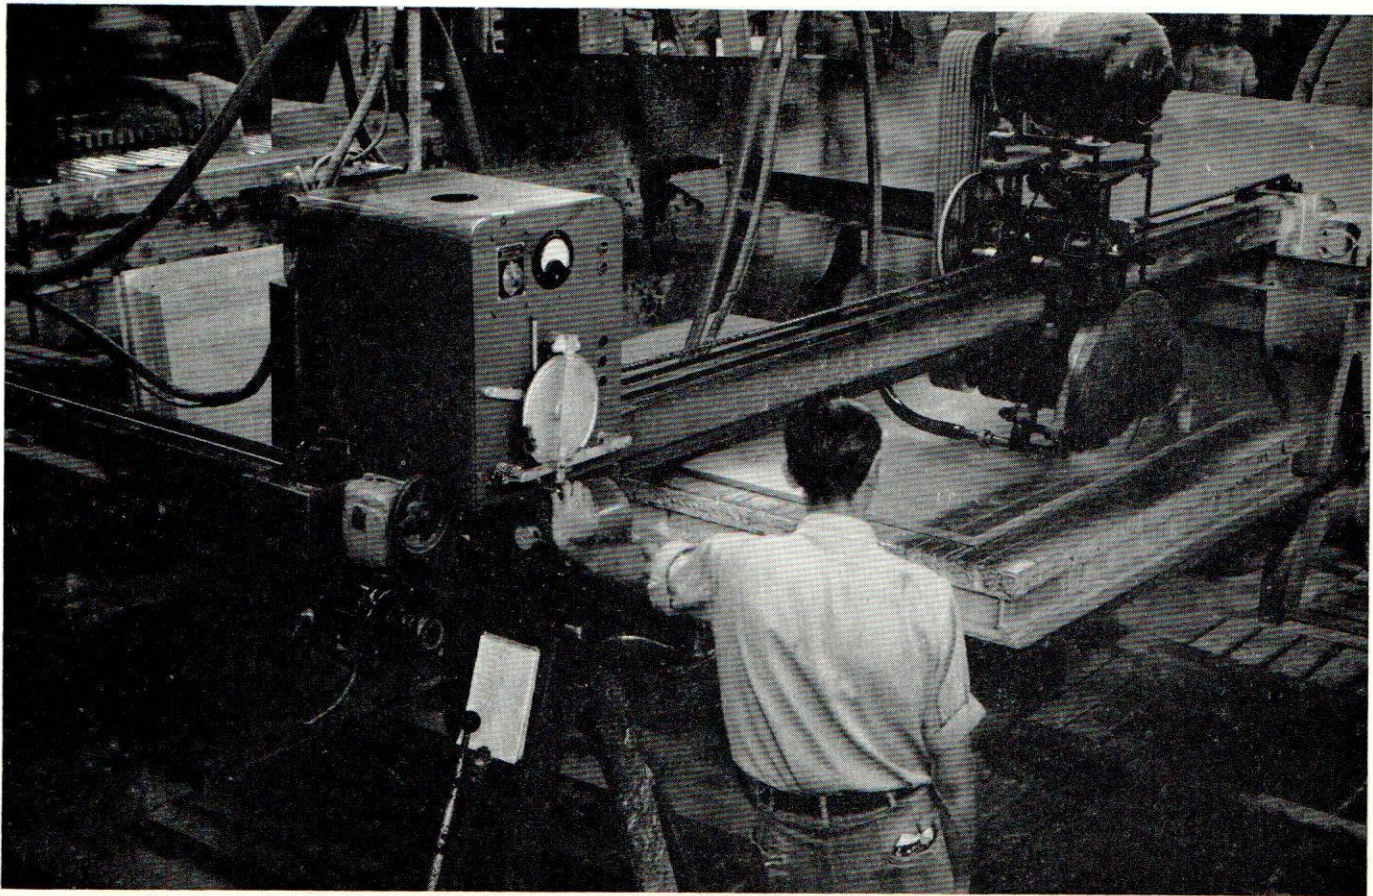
Coping saw for trimming marble. (Photo courtesy Ty-Sa-Man Machine Co., Knoxville)
